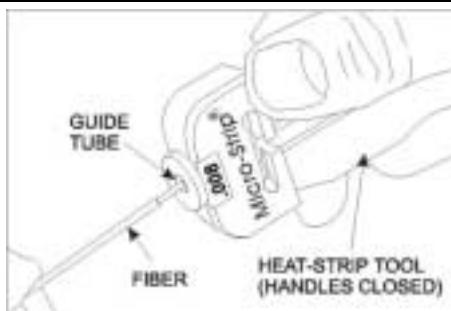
Heat-Strip Tool - Removing Coating from Coated Fiber
